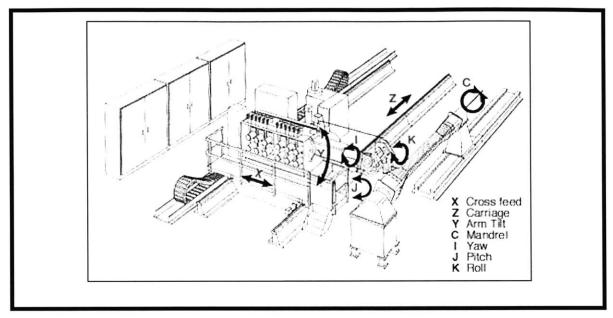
Tow Placement Machine [Cincinnati Machine]
